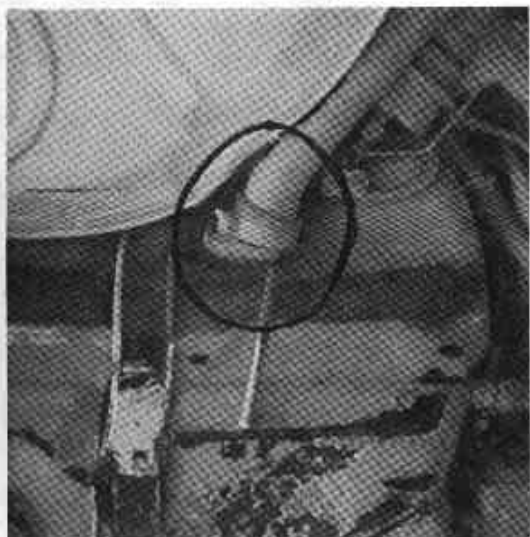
A PEN INDICATING BREAK IN FILLER TUBE
